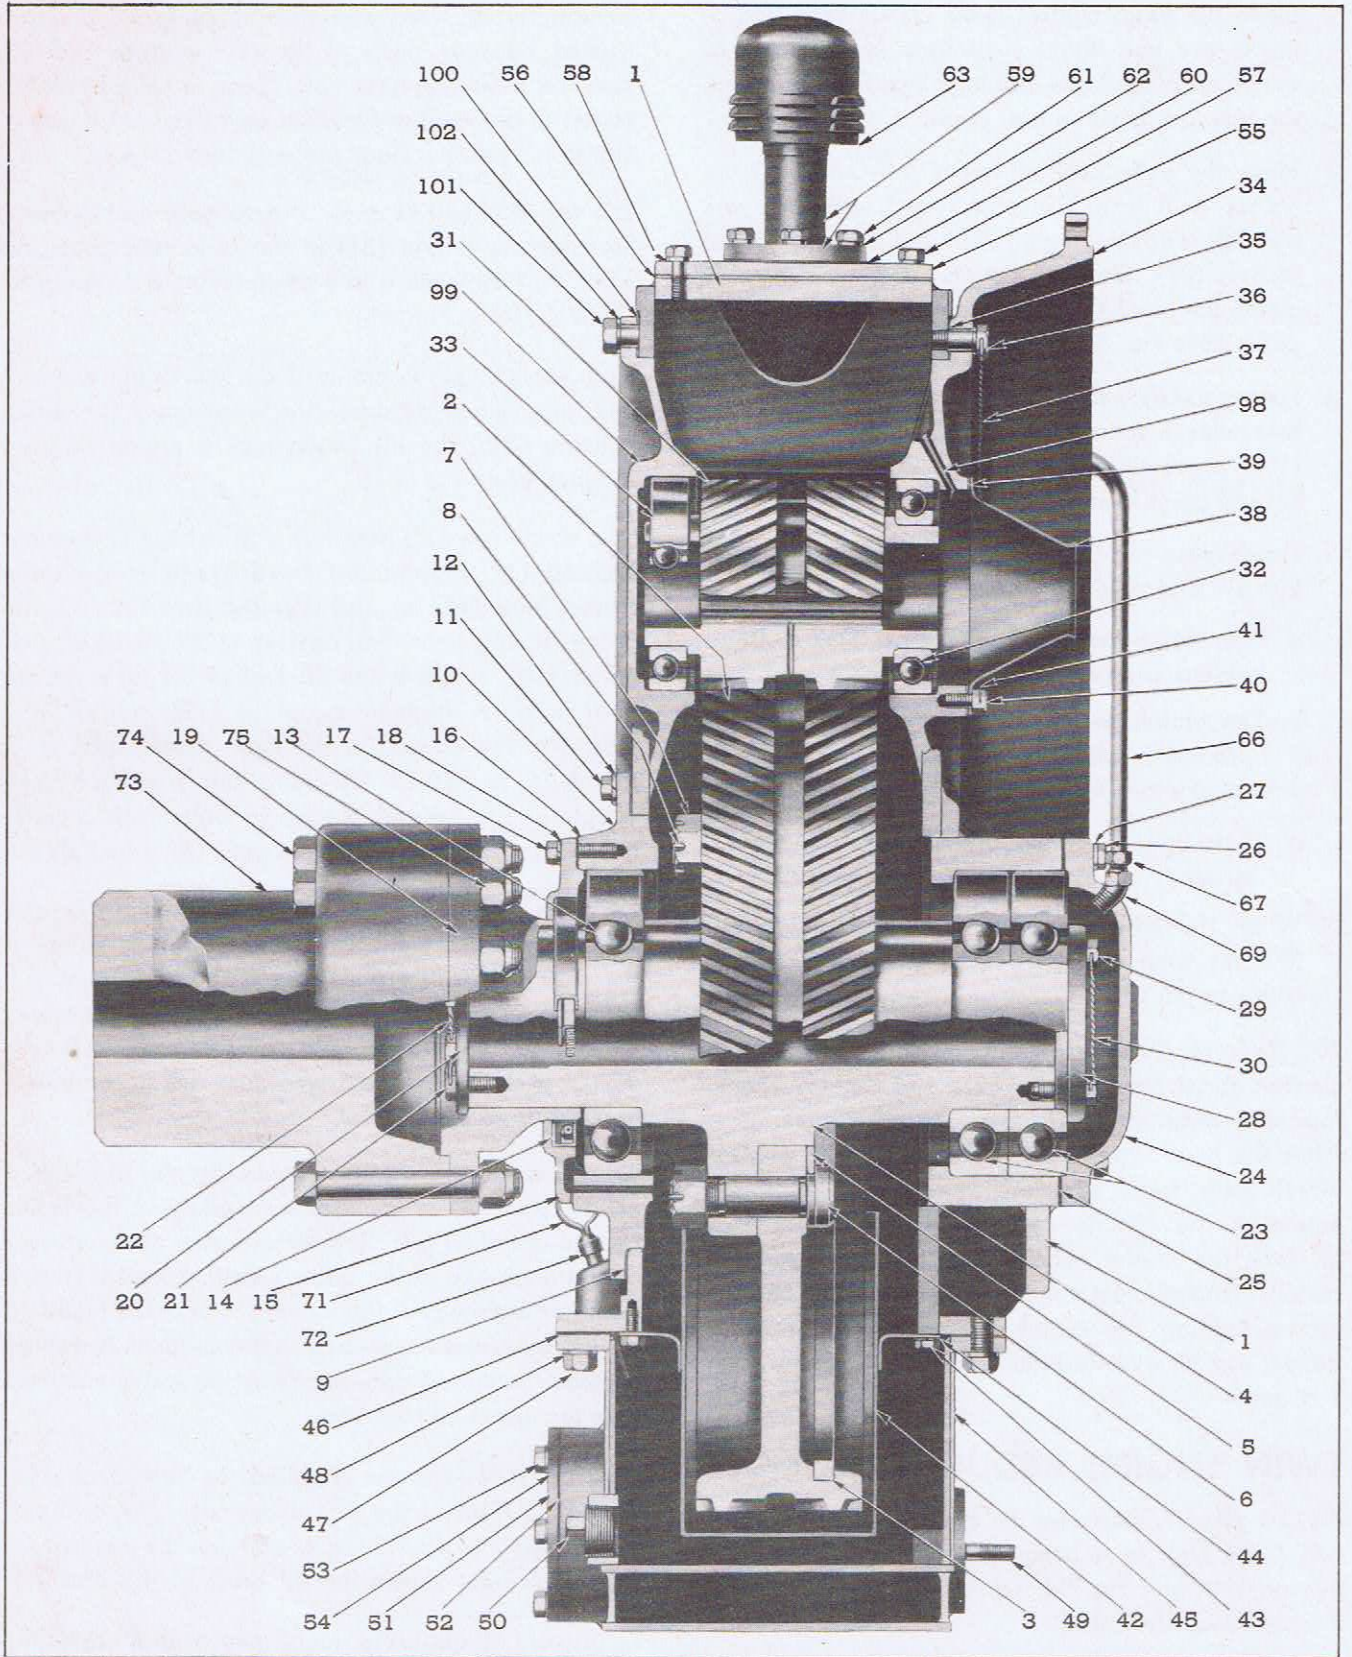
TWIN ENGINE REDUCTION GEAR ASSEMBLY.
